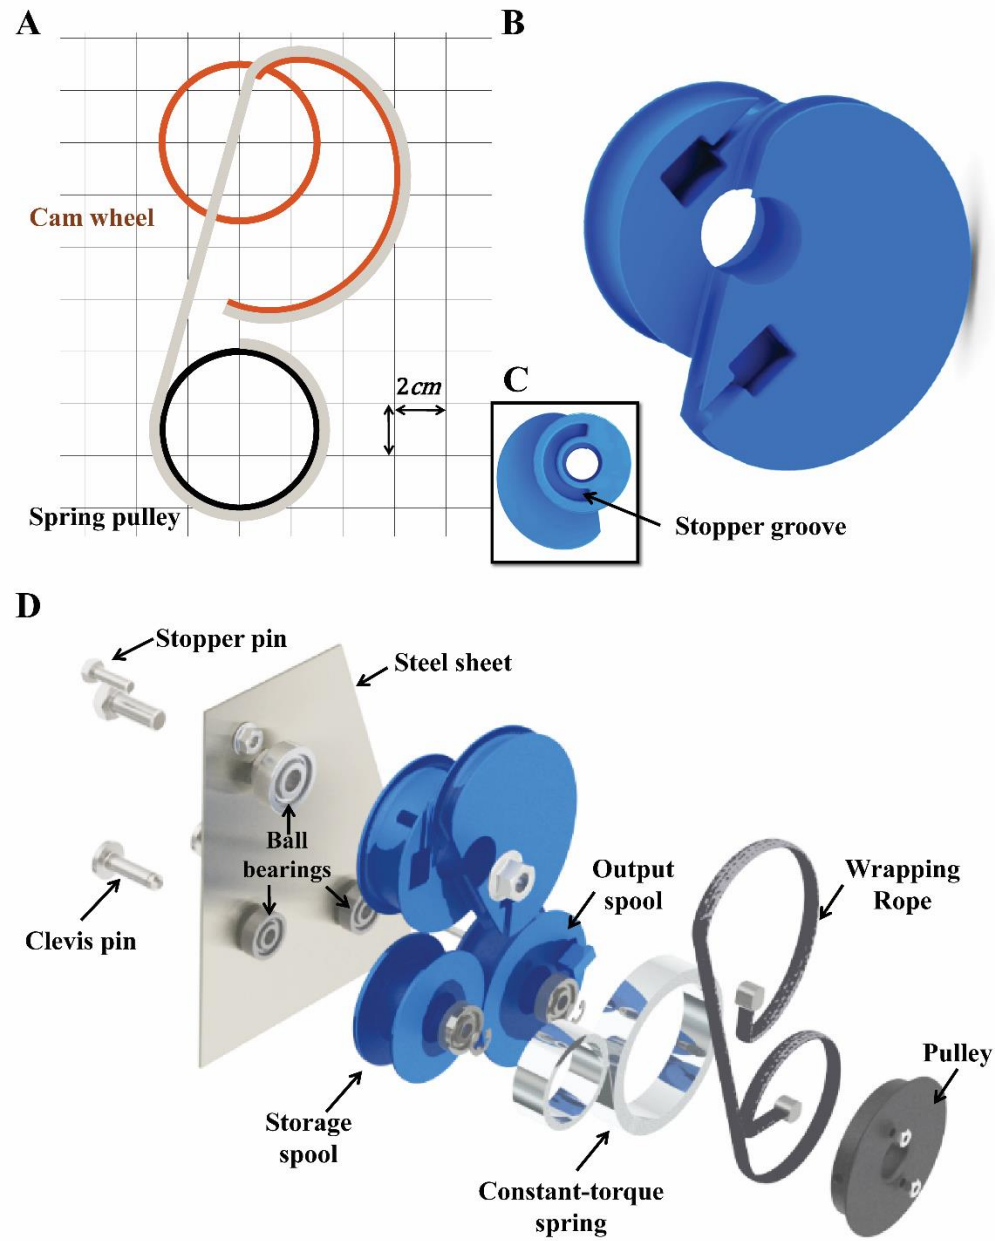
A) Profile of the cam-wheel. B) CAD model of the cam-wheel. C) Posterior view of the cam-wheel. D) Exploded view of the spring-cam-wheel module assembly.
